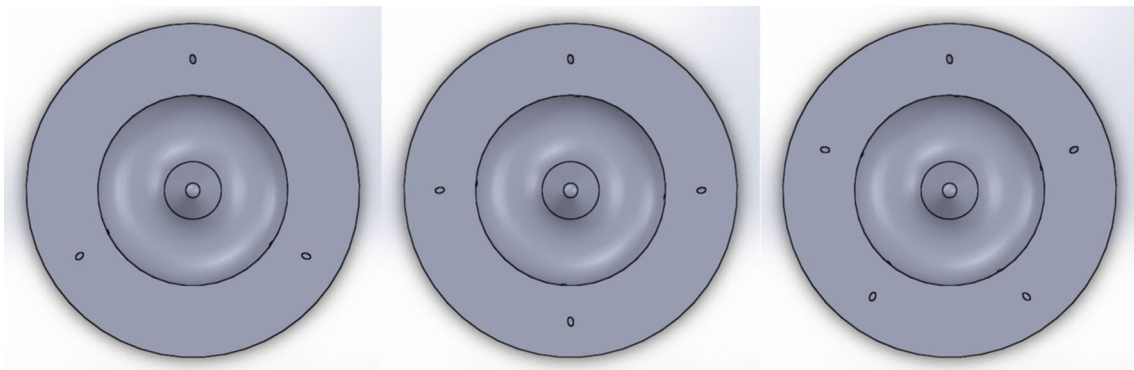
CAD view of 1.5-mm-diameter hole with the hole count of 3, 4, and 5
